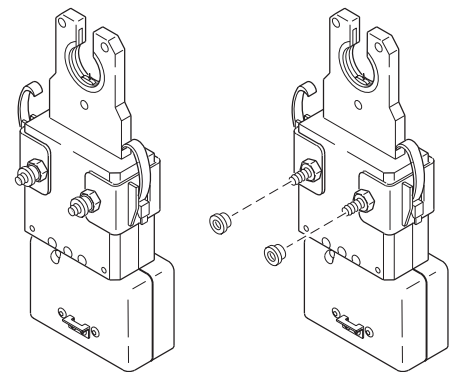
Storing the Thumb Nuts on the Adapter Screws
